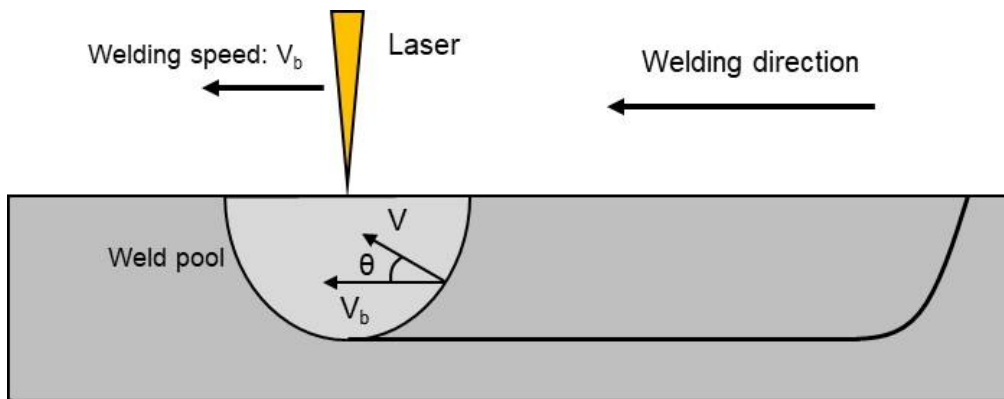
Schematic illustration of solid-liquid interface growth speed in welding pool.
